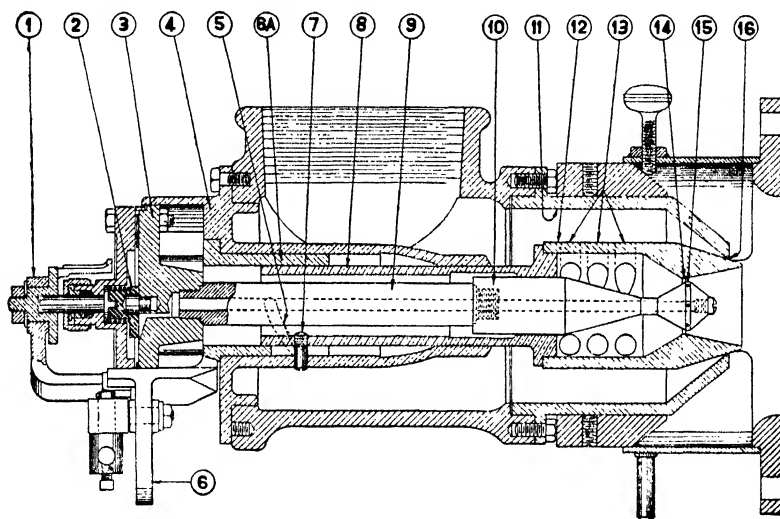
An air-atomizing oil burner. (1) Oil-control valve lever. (2) Oil-control valve cam. (3) Oil-control valve consisting of a V-groove in a flat surface. (4) Burner backplate. (5) Curved slot. (6) Operating lever. (7) Inner-nozzle operating pin. (8) Inner air-nozzle operating tube. (9) Oil tube. (10) Oil nozzle. (11) Outer air nozzle. (12) Inner air nozzle. (13) Primary air-supply openings. (14) Primary air discharge. (15) Oil nozzle. (16) Secondary air-discharge opening. (Courtesy of Hauck Manufacturing Company.)
